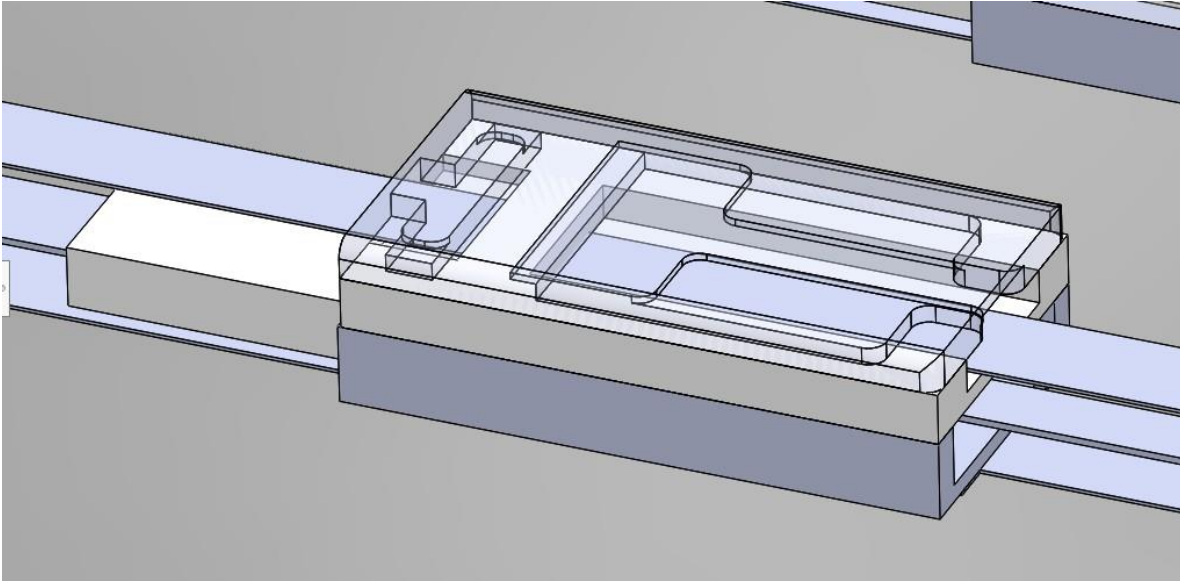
Final CAD Model: Assembly of middle finger guide and springs under partial transparency.
